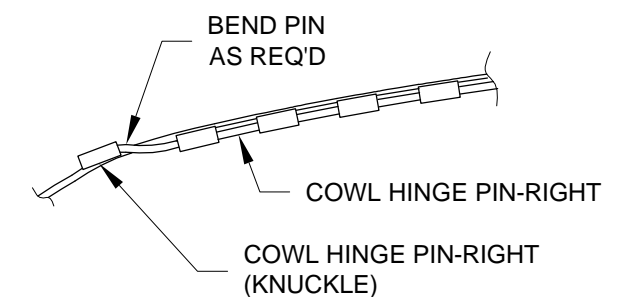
SETTING THE PIN LENGTH (RIGHT SHOWN)
